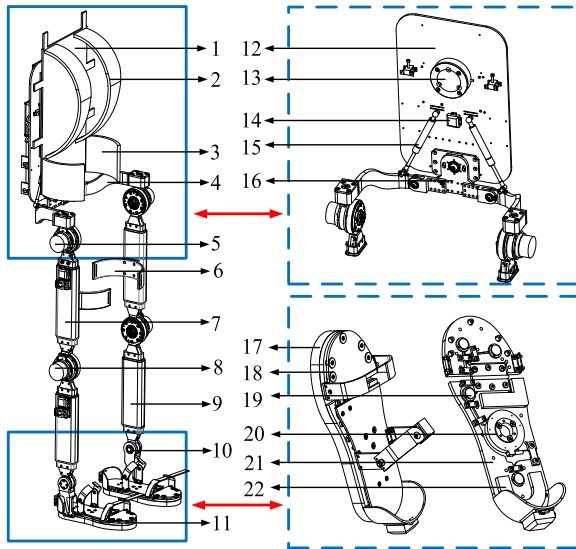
Mechanical structure of the exoskeleton. 1: inner backpack, 2: shoulder belt, 3: waist belt, 4: waist connecting part, 5: hip joint, 6: thigh attachment, 7: thigh segment, 8: knee joint, 9: shank segment, 10: ankle joint, 11: wearable shoes, 12: outer backpack, 13: six-dimensional force sensor on backpack, 14: inertial measurement unit, 15: gas spring, 16: waist adjustment part, 17: lower sole of wearable shoes, 18: upper sole of wearable shoes, 19: pressure sensor, 20: six-dimensional force sensor on wearable shoes, 21: middle sole of wearable shoes, 22: rubber insert.
